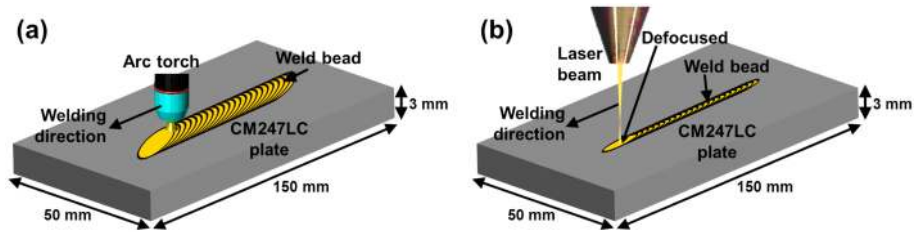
Specimen dimensions and schematic of the bead-on-plate welding via (a) GTAW and (b) LBW.
